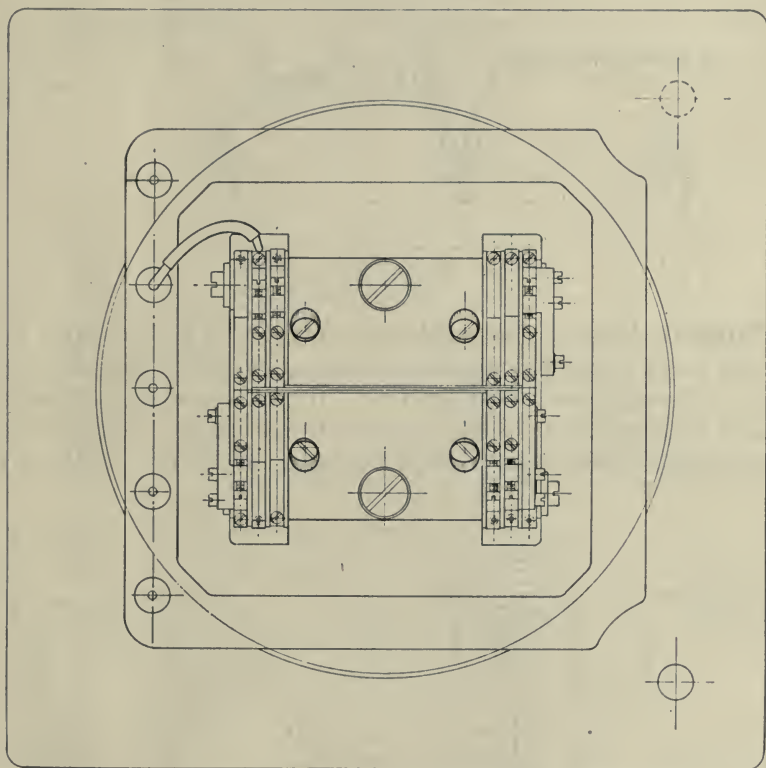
Illustrating clamp carriage and ribbon arrangement.
